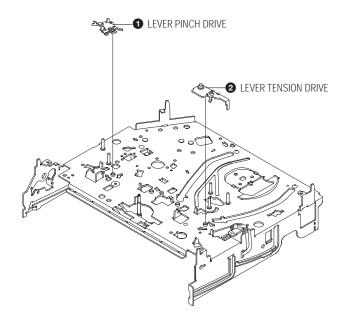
Lever Pinch Drive, Lever Tension Drive Removal
